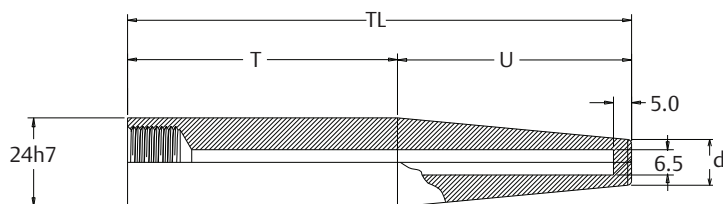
Weld-In Barstock Thermowell (Codes W10, W12, W14, W16)
